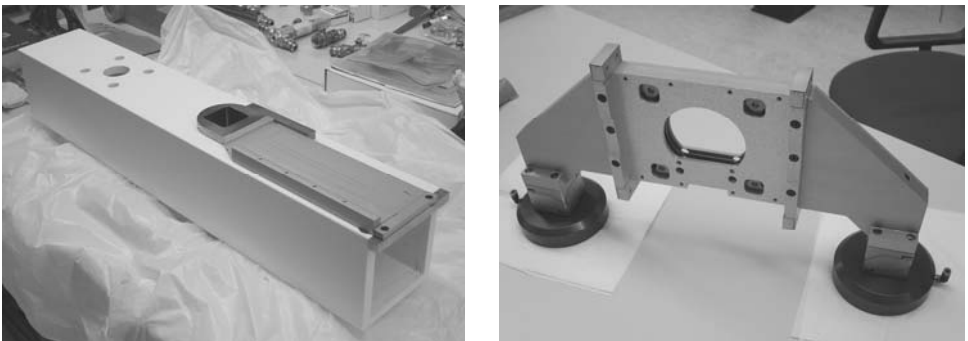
Alumina Z-stage tube and lower bearings bridge
